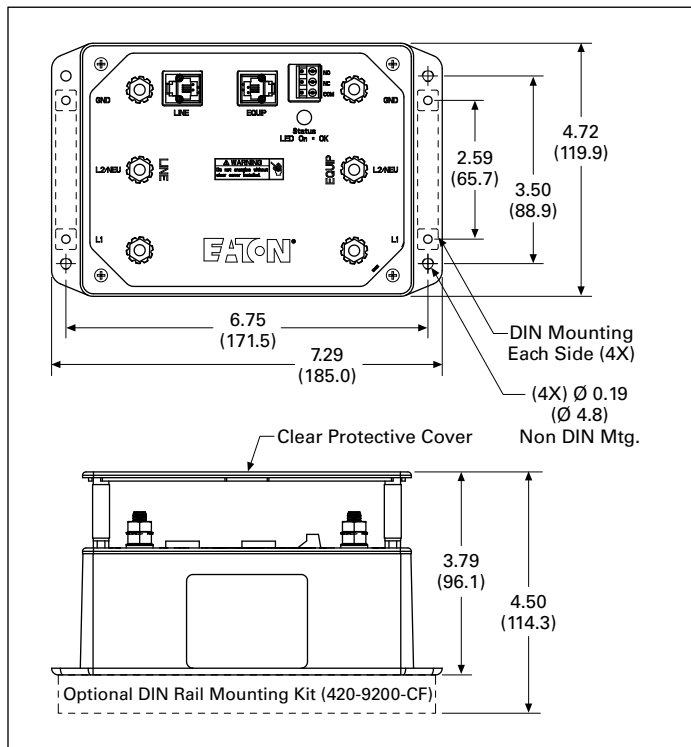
AGCFxxx60xxx Dimensions in Inches (mm)
